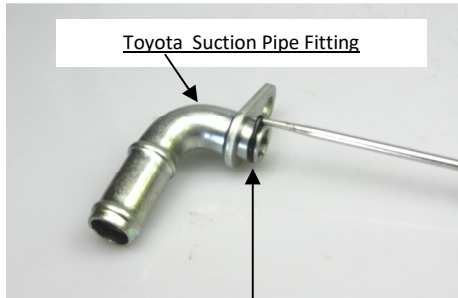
New O-Ring installed on fitting and fitting bolted to Pump Housing ready for installation to vehicle.
